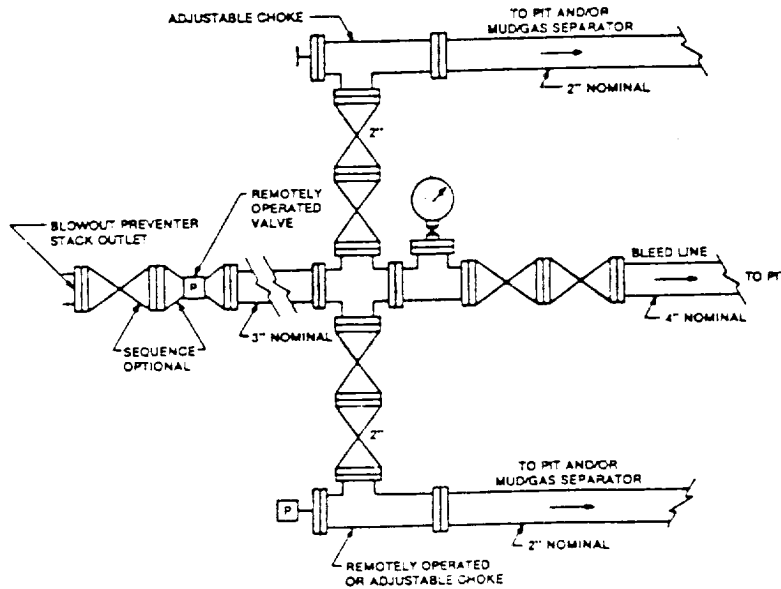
Typical choke manifold assembly for 5M rated working pressure service — surface installation.
